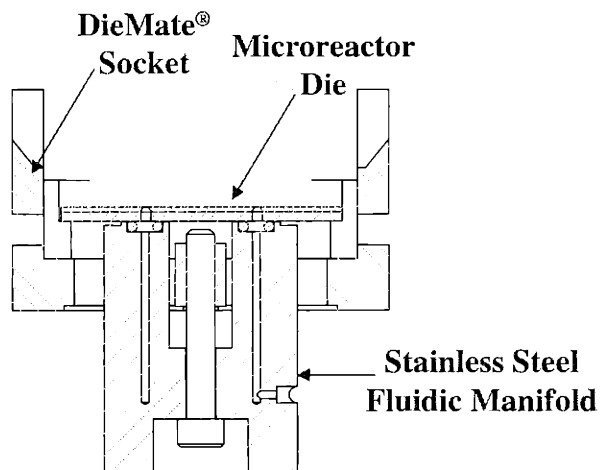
Cross-section AA of the reactor board drawing in Figure A-7 showing the mounting of the reactor in the DieMate<sup>®</sup> socket and fluidic interconnection method used with the socket.
